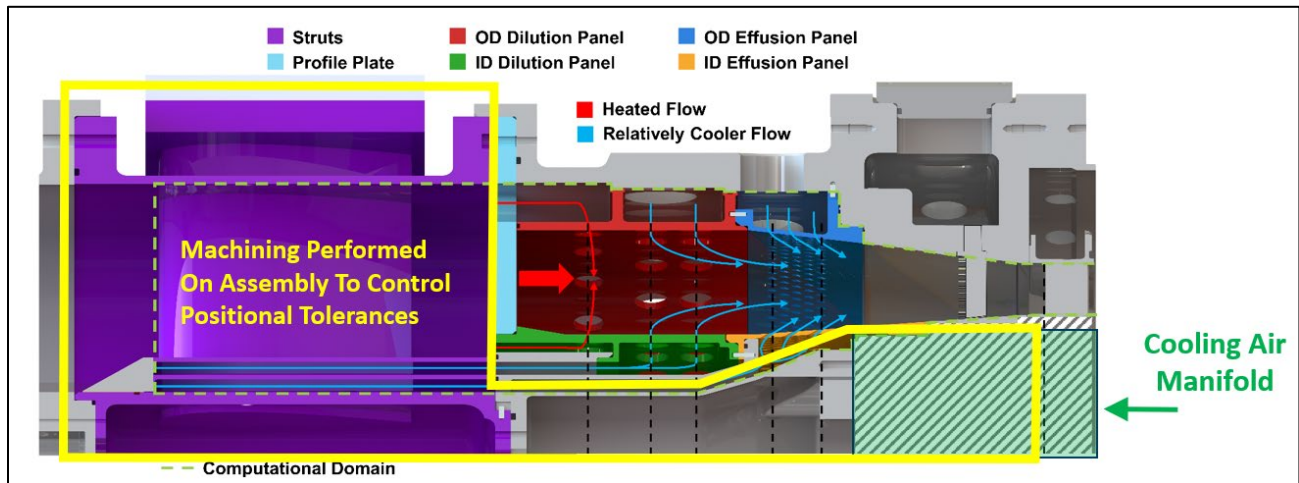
Cross-section drawing of the combustor profile simulator indicating two highlighted regions in which hardware manufacturing was completed to help enable the simulator hardware assembly to become a single independent module and accurately align with the turbine hardware. ID: inner diameter, OD: outer diameter.
